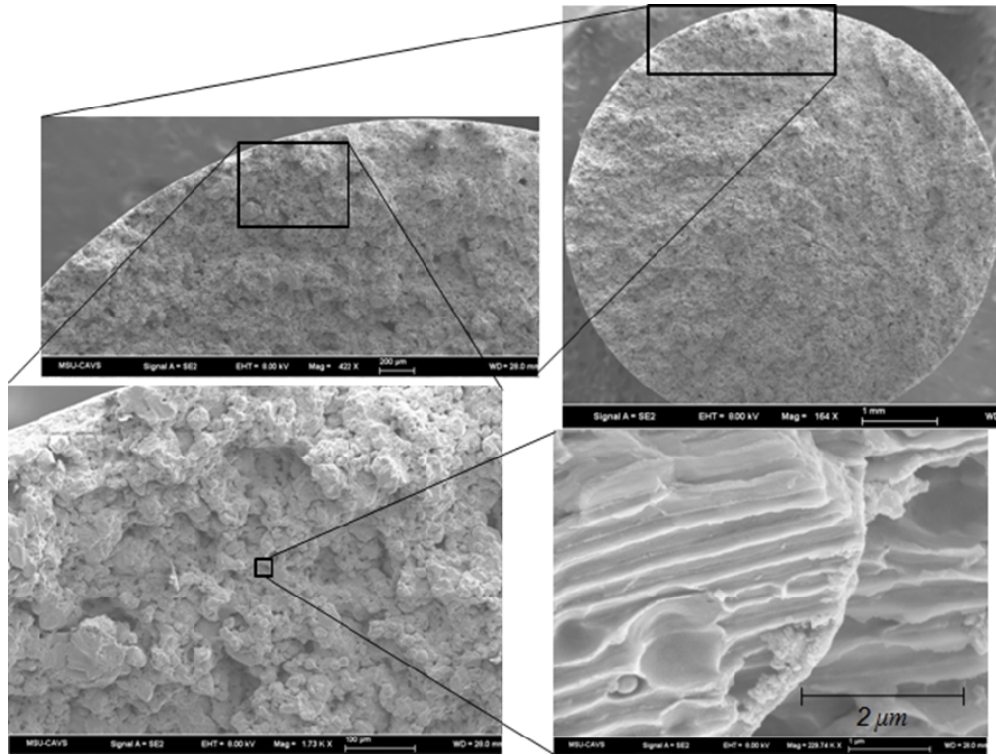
Fracture surfaces of fatigue Specimen A.
